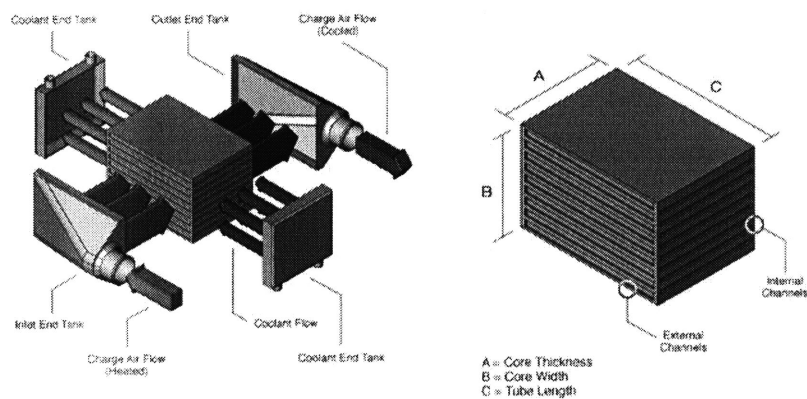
Detailed drawing of the intercooler from Bell with dimensions
